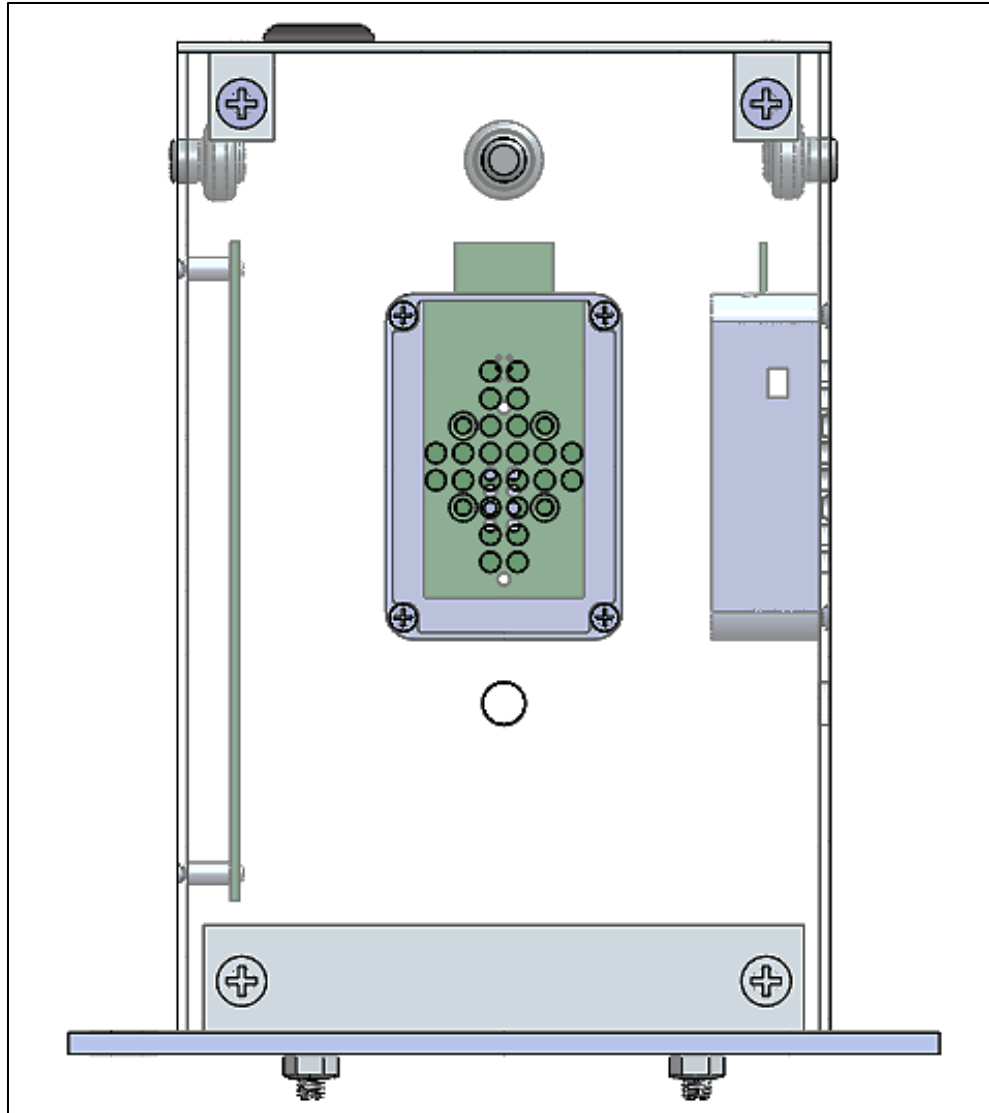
(e) Inside view of design of sides # 1 and 3 of the payload
